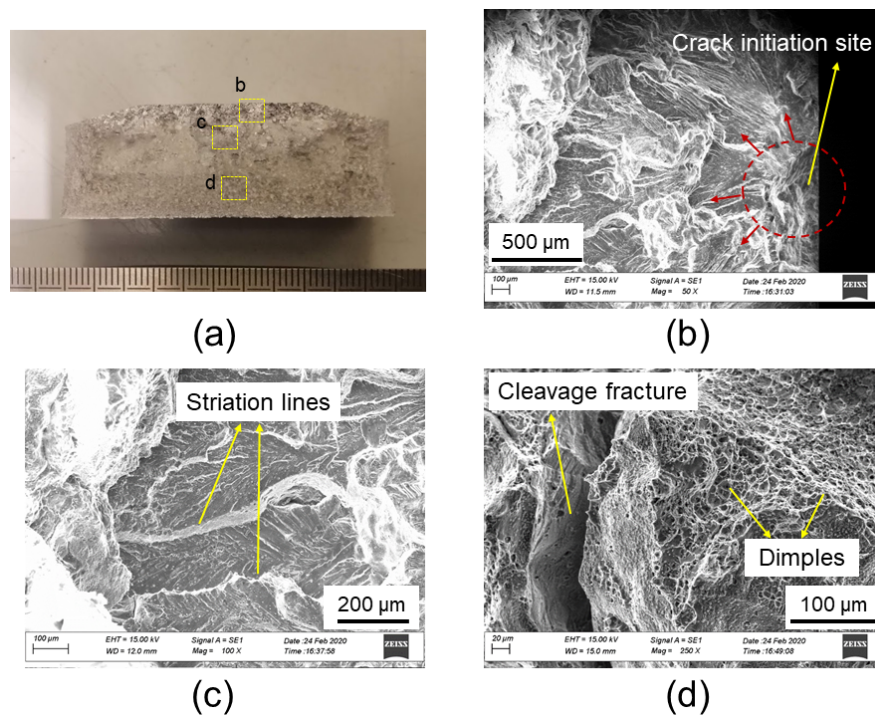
Fractography of as-received Al6061-T6 alloy; (a) fractured surface; (b) crack initiation site; (c) slow crack growth region; and (d) fast fracture region.
